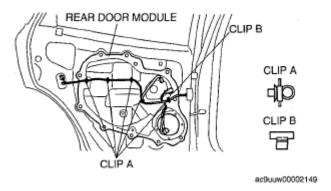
Identifying Rear Door Module And Clip Courtesy of MAZDA MOTORS CORP.
